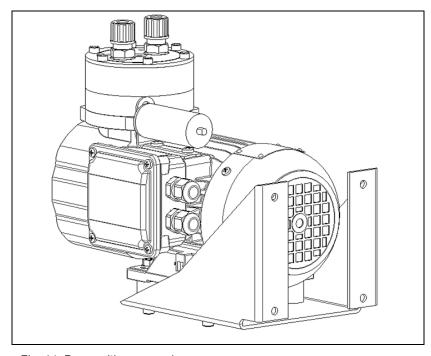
Pump with accessories (illustrated with hose fitting, assembly kit for anti-vibration buffer and mounting bracket)
